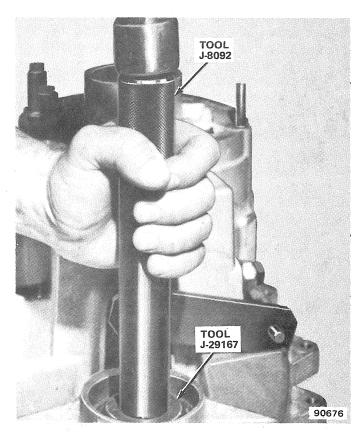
D-28 Front Output Shaft Front Bearing Installation
